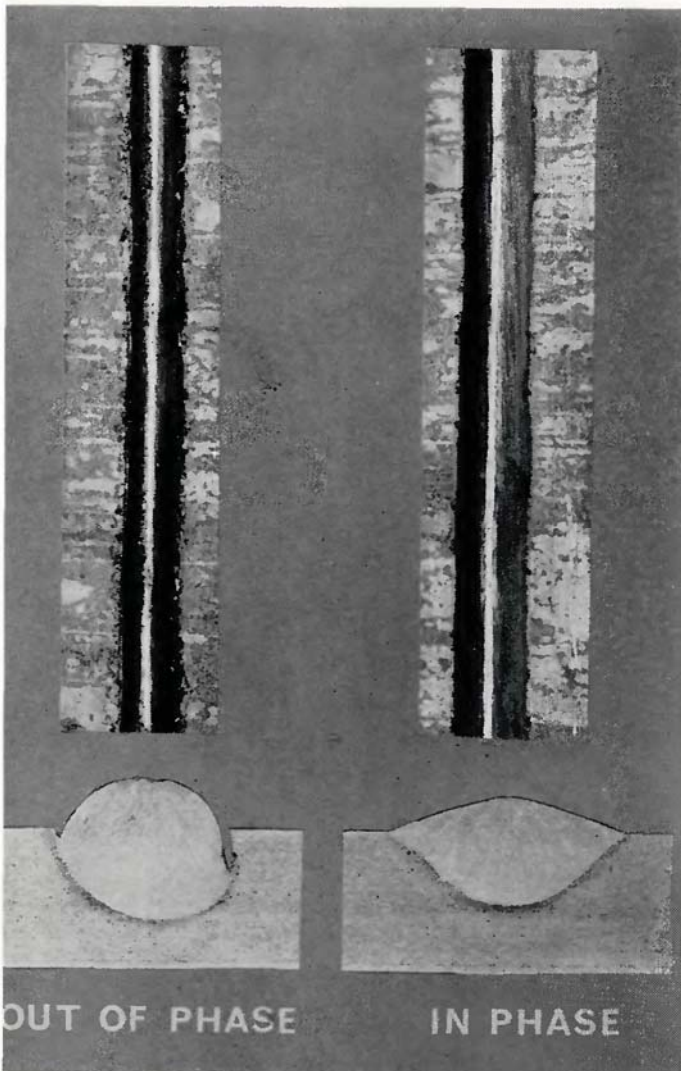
Welds demonstrating the importance of transformer phasing on obtaining good weld results
